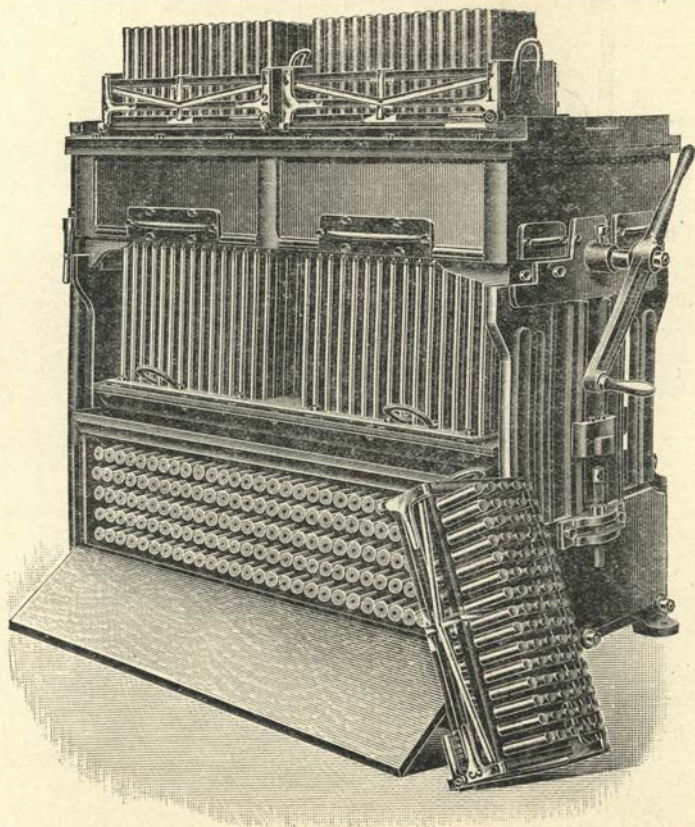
Cowles' Candle Moulding Machine, adapted for Female Labour.
